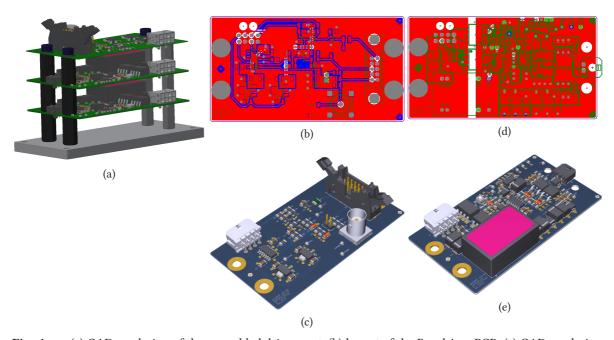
(a) CAD rendering of the assembled driver part, (b) layout of the Pre-driver PCB, (c) CAD rendering of the Pre-driver PCB, (d) layout of the Driver PCB and (e) CAD rendering of the Driver PCB.
